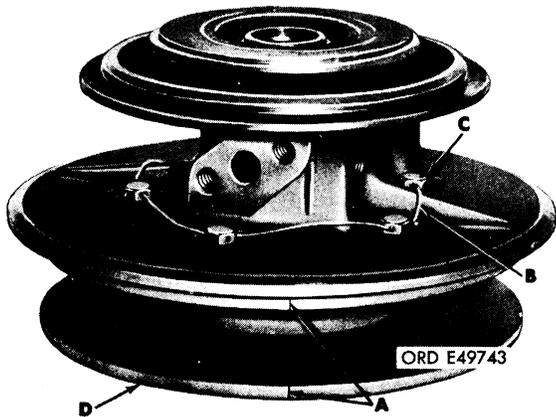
REMOVING THRUST COLLAR ASSEMBLY AND RELATED PARTS - TURBOCHARGERS 7748900 AND 10935279.
